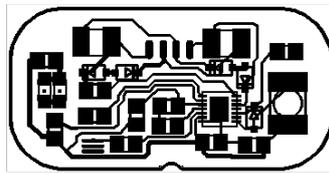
Sample PCB layout on area of the mp6 housing, height approx. 3mm
